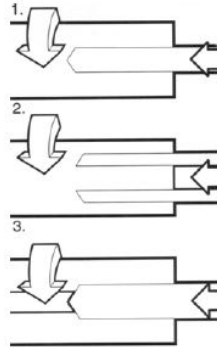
Three different kinds of deep hole drilling methods – 1. Solid drilling, 2. Trepanning, 3. Counterboring a pre drilled hole. (DS, Deep Hole Drilling, 2008)
